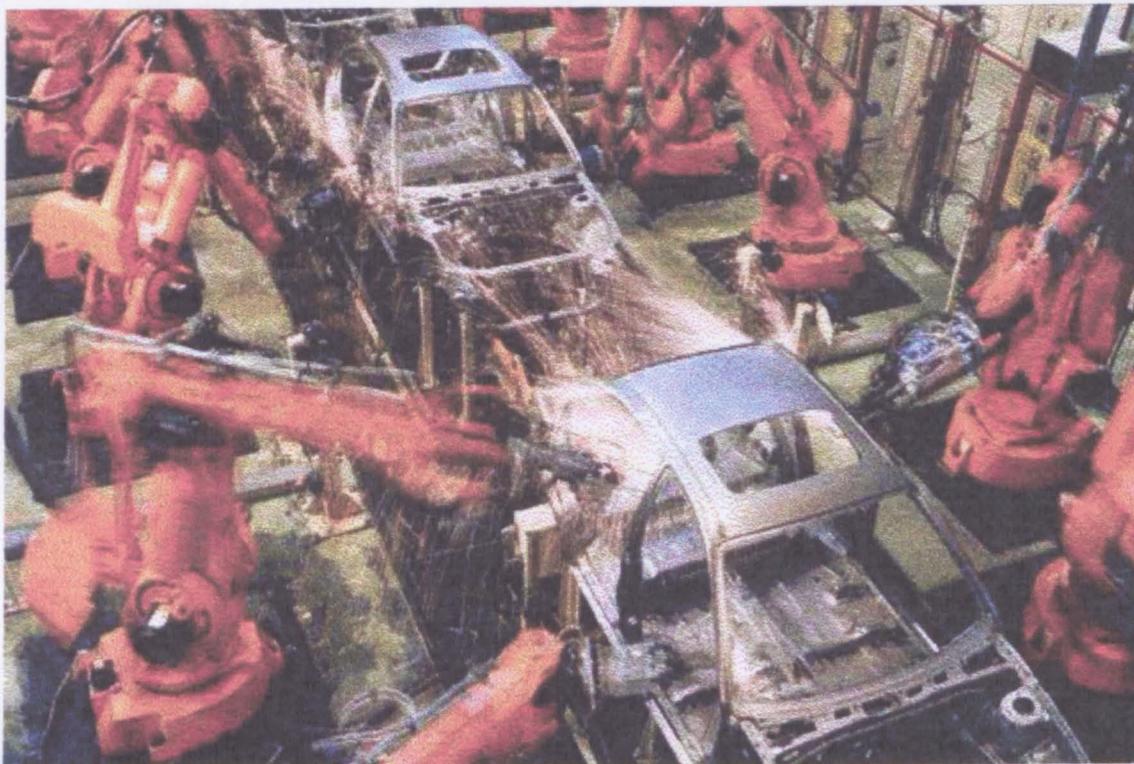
Spot welding. (Source: ABB Flexible Automation.)
